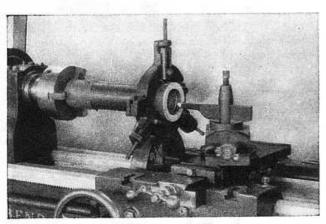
Cutting Internal Threads on an 18-inch Lathe
